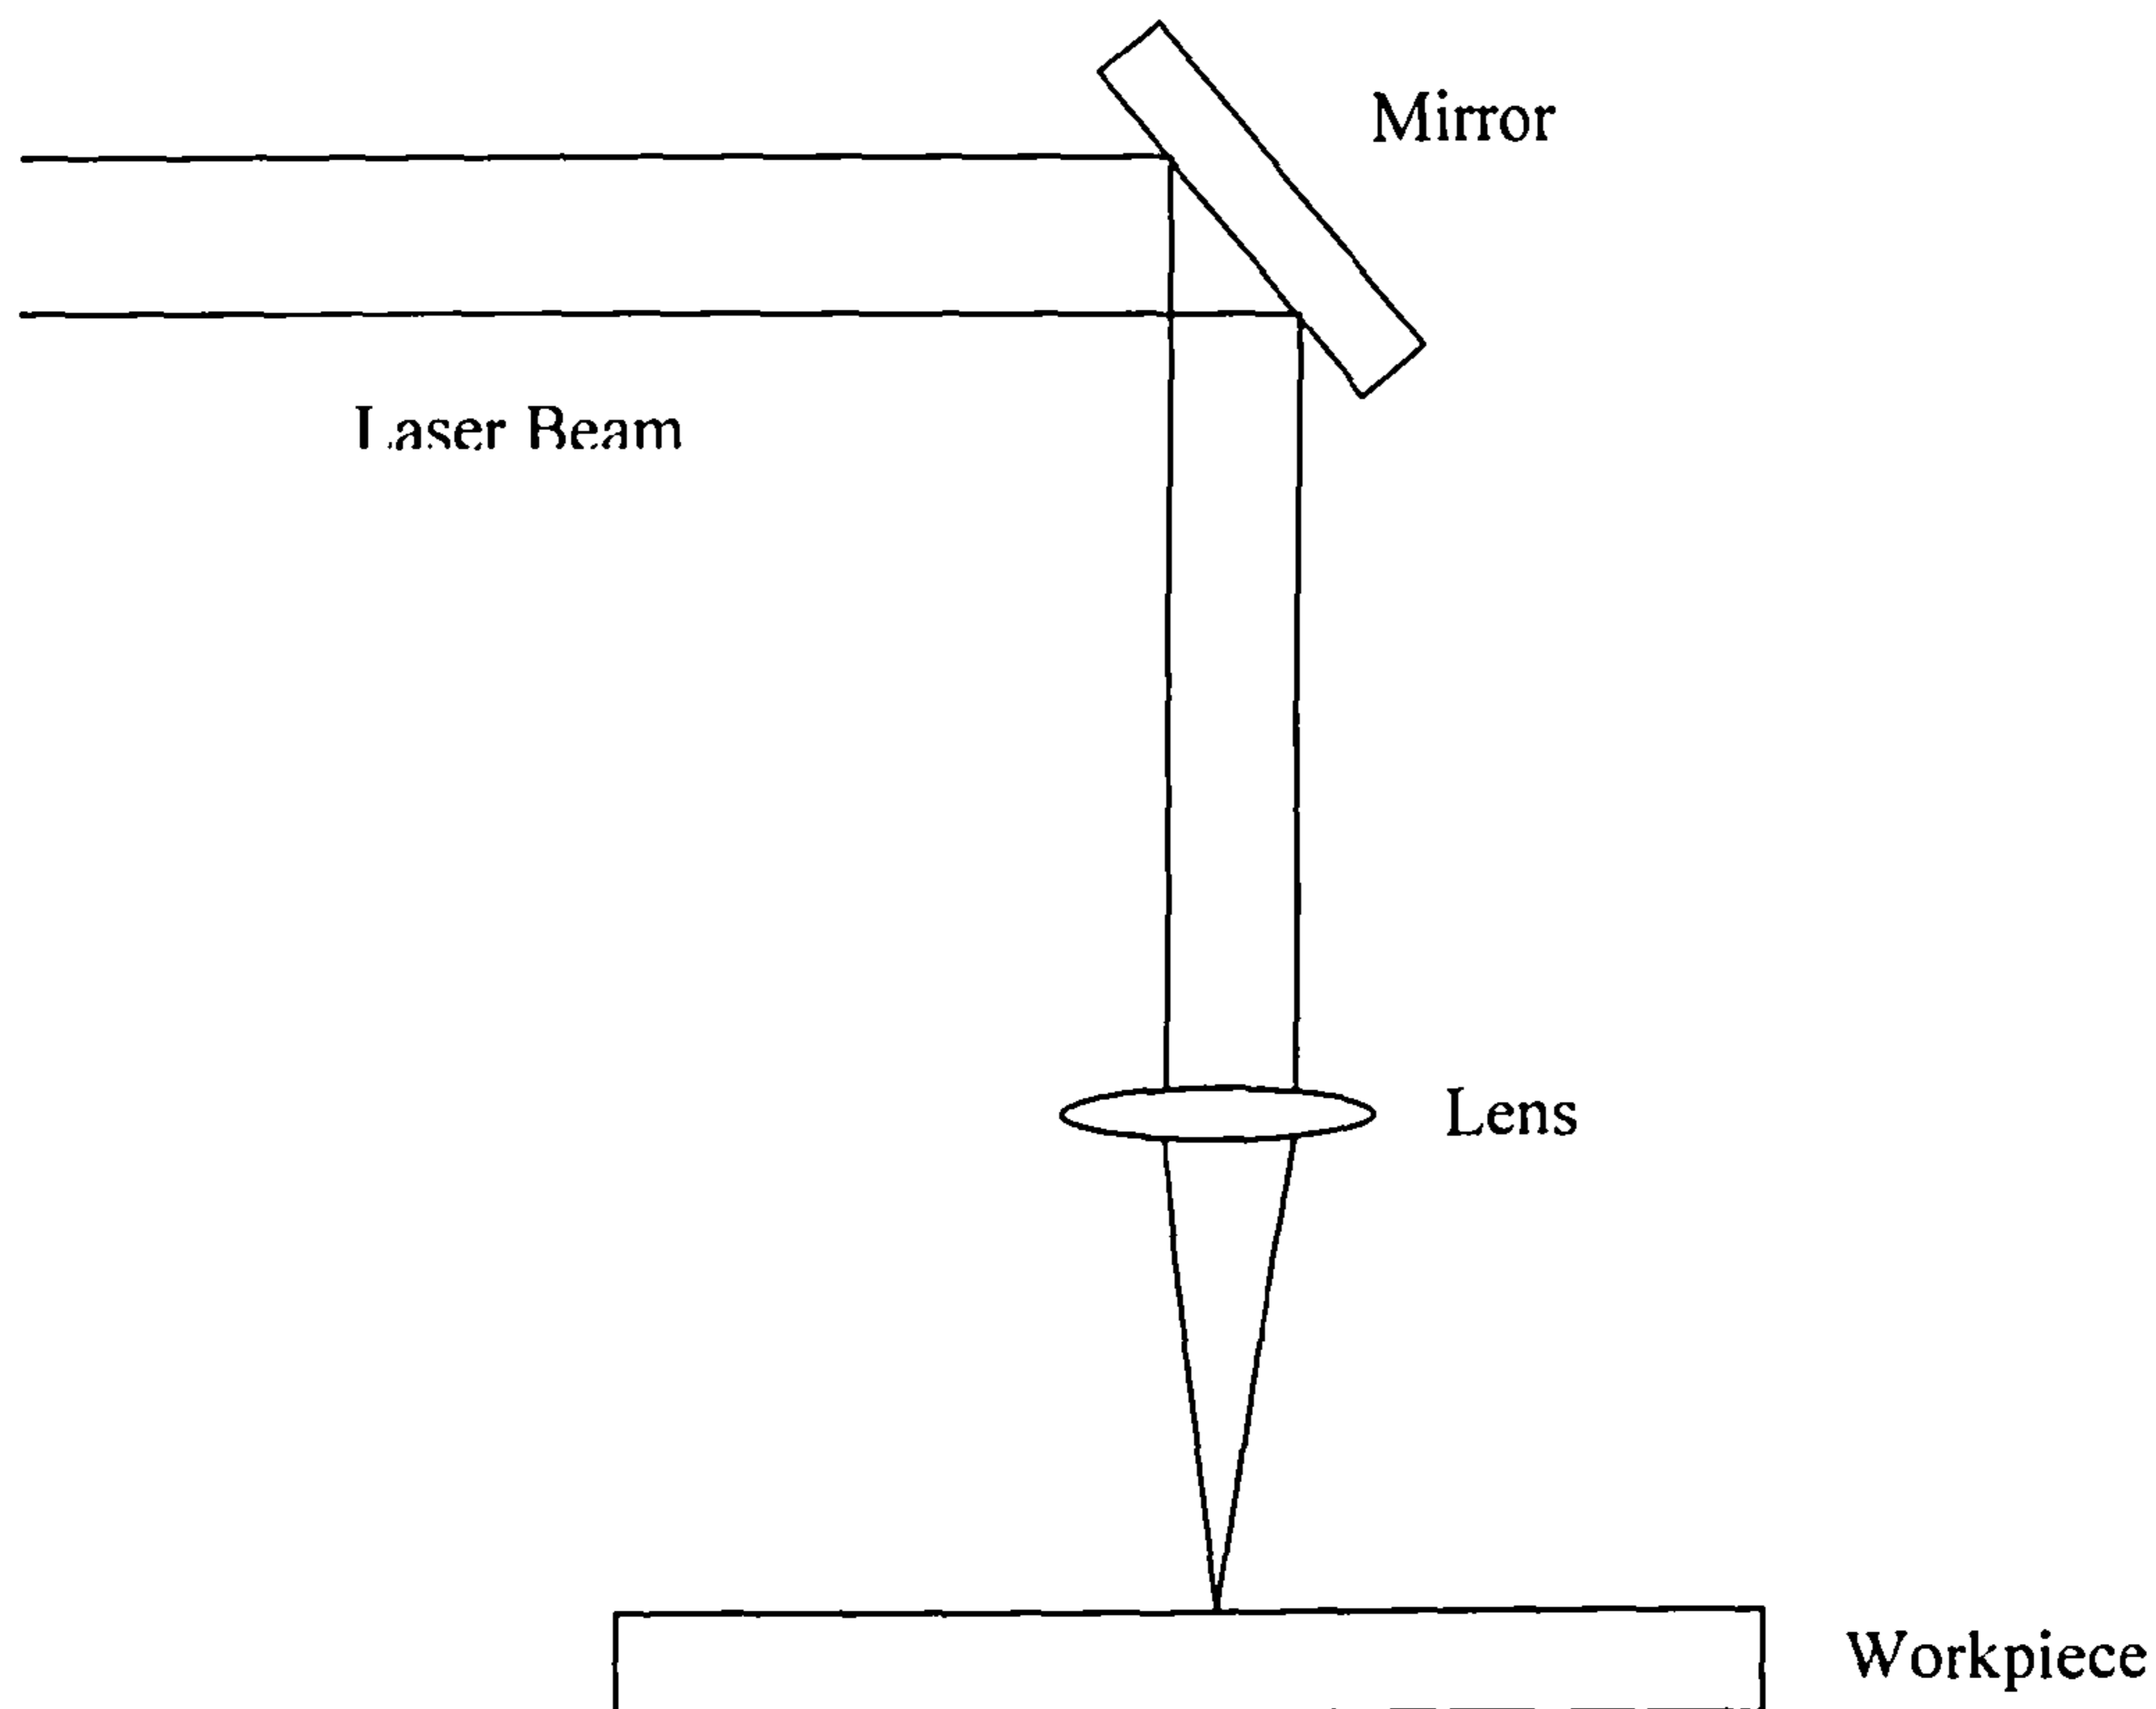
Schematic of laser beam/workpiece arrangement
